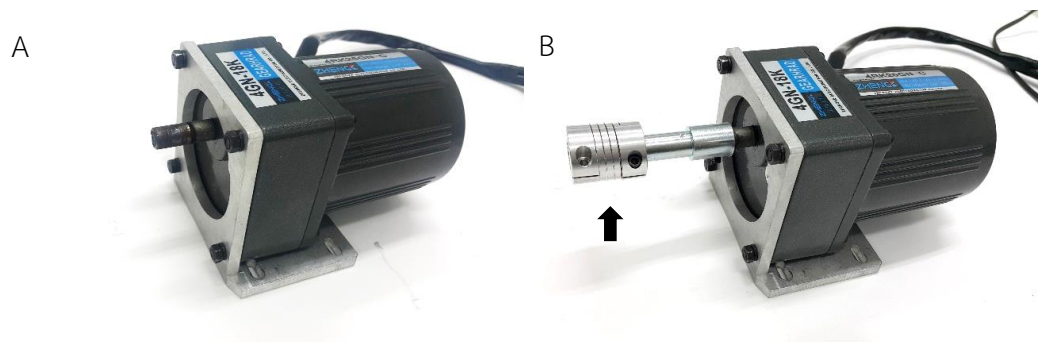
(A) Electric motor before inserting the coupling. (B) Electric motor after inserting the coupling with spring (arrow) to reduce resistant force that affected the motor after specimen already broken.
